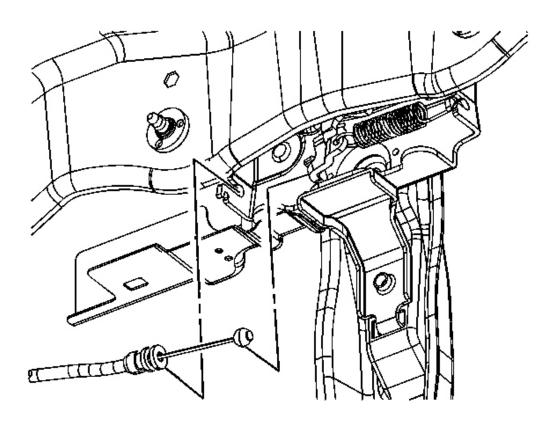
View Of Hood Latch Cable Courtesy of GENERAL MOTORS CORP.
